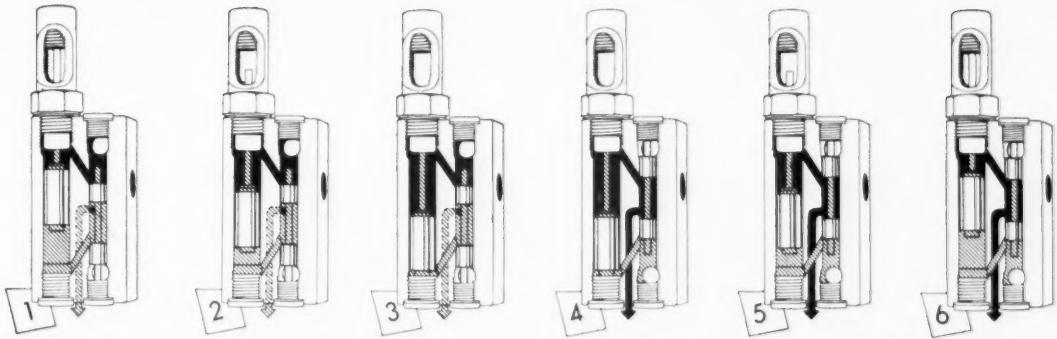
Exploded View of one of the Metering Valves on System shown in Figure 15
